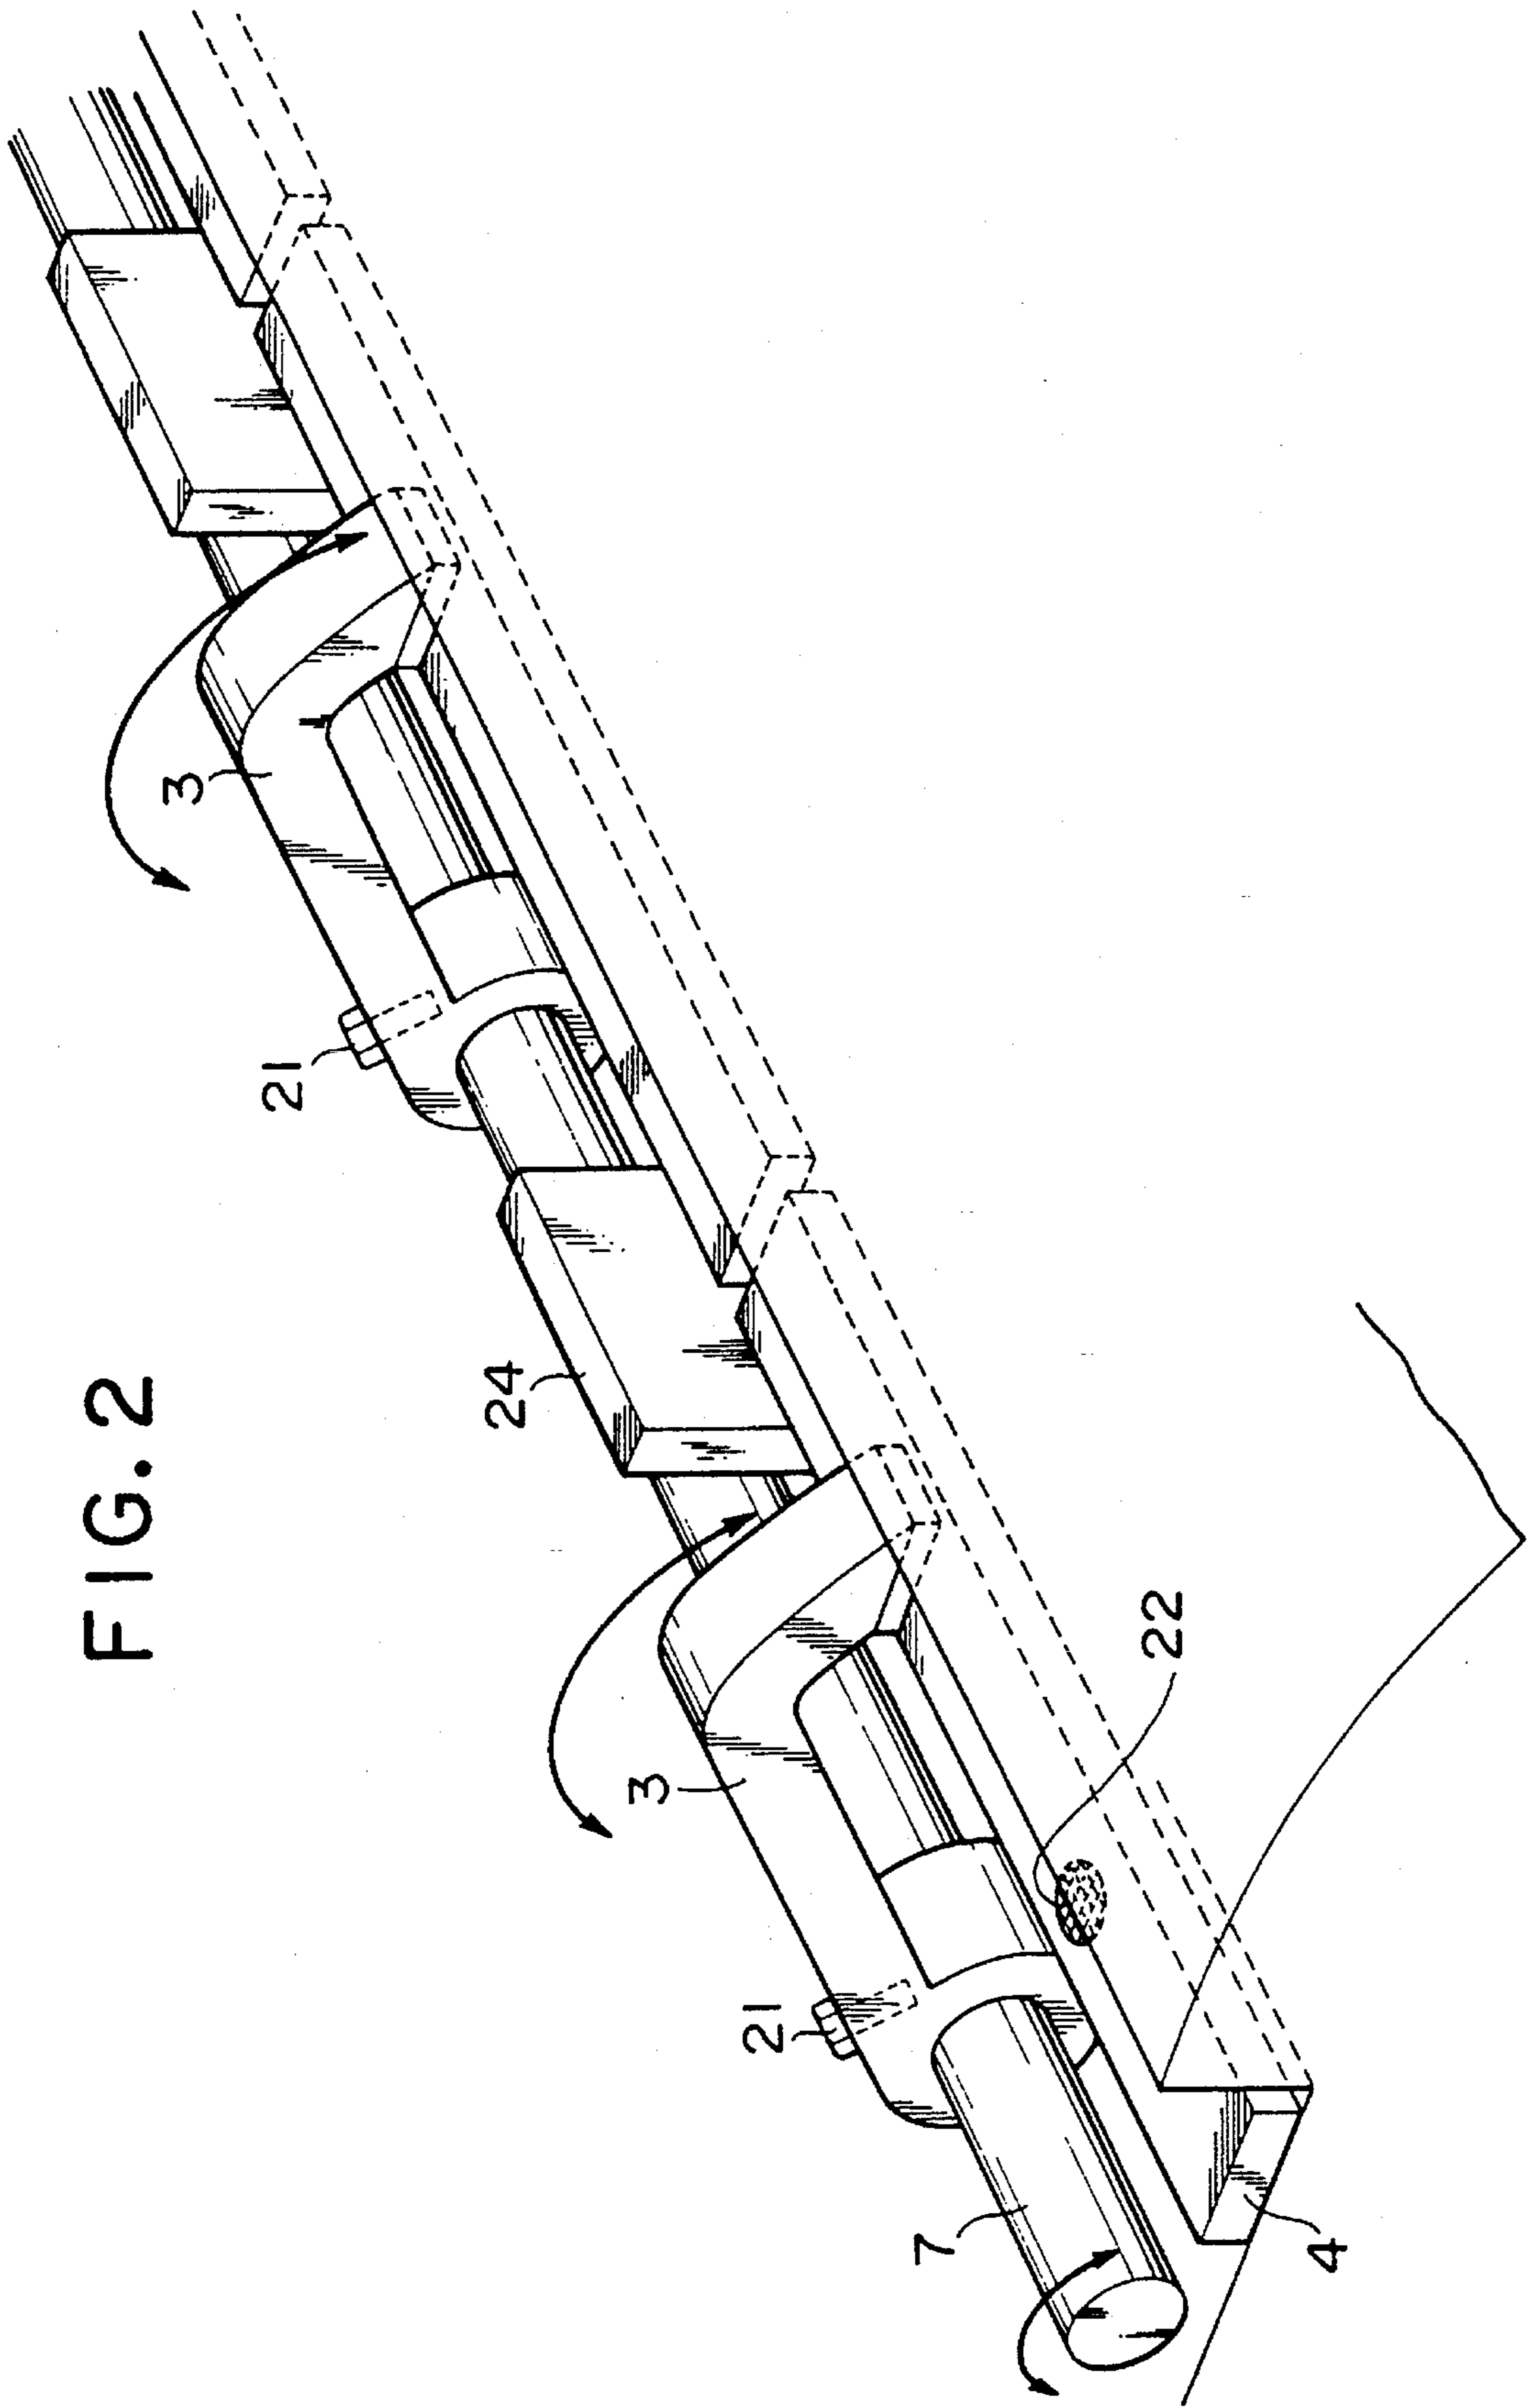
IMAGE TRANSFER APPARATUS WITH TRANSFER DRUM CLAMPING MECHANISM
